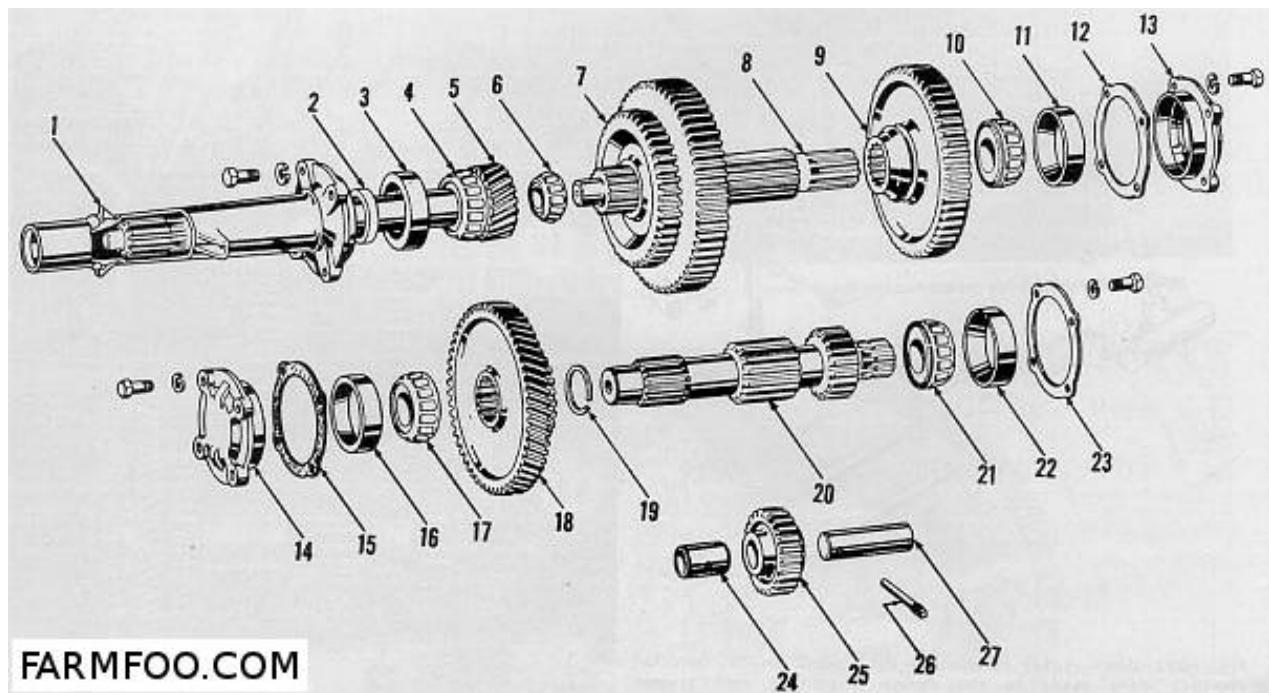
Transmission gears and shafts on models 2N-9N.
